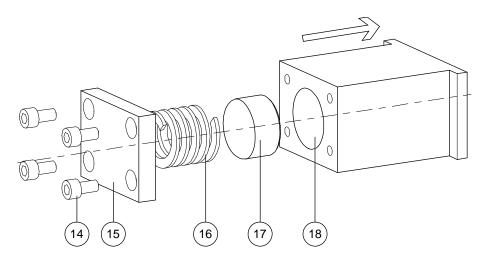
Replacing adjustable die housing (inner side) bearing
